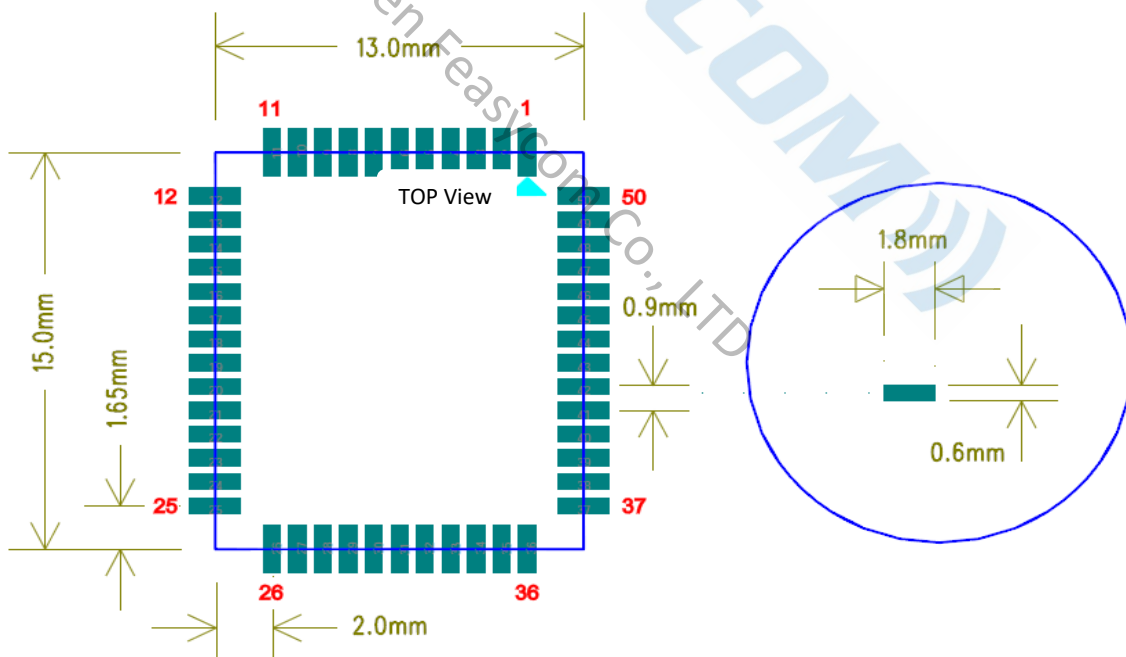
FSC-BW127 footprint Layout Guide (Top View)
